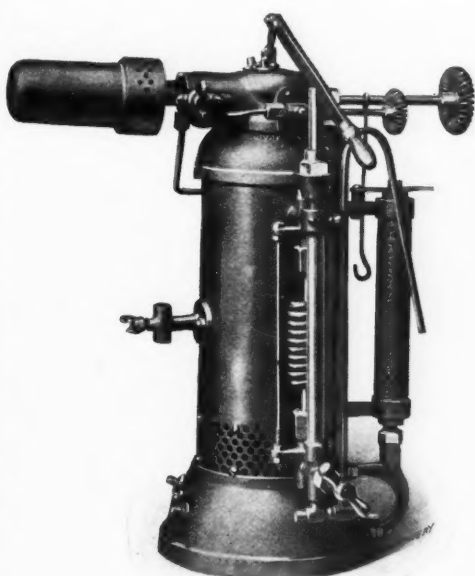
Front View of Volcano No. 3-C Hand Torch
